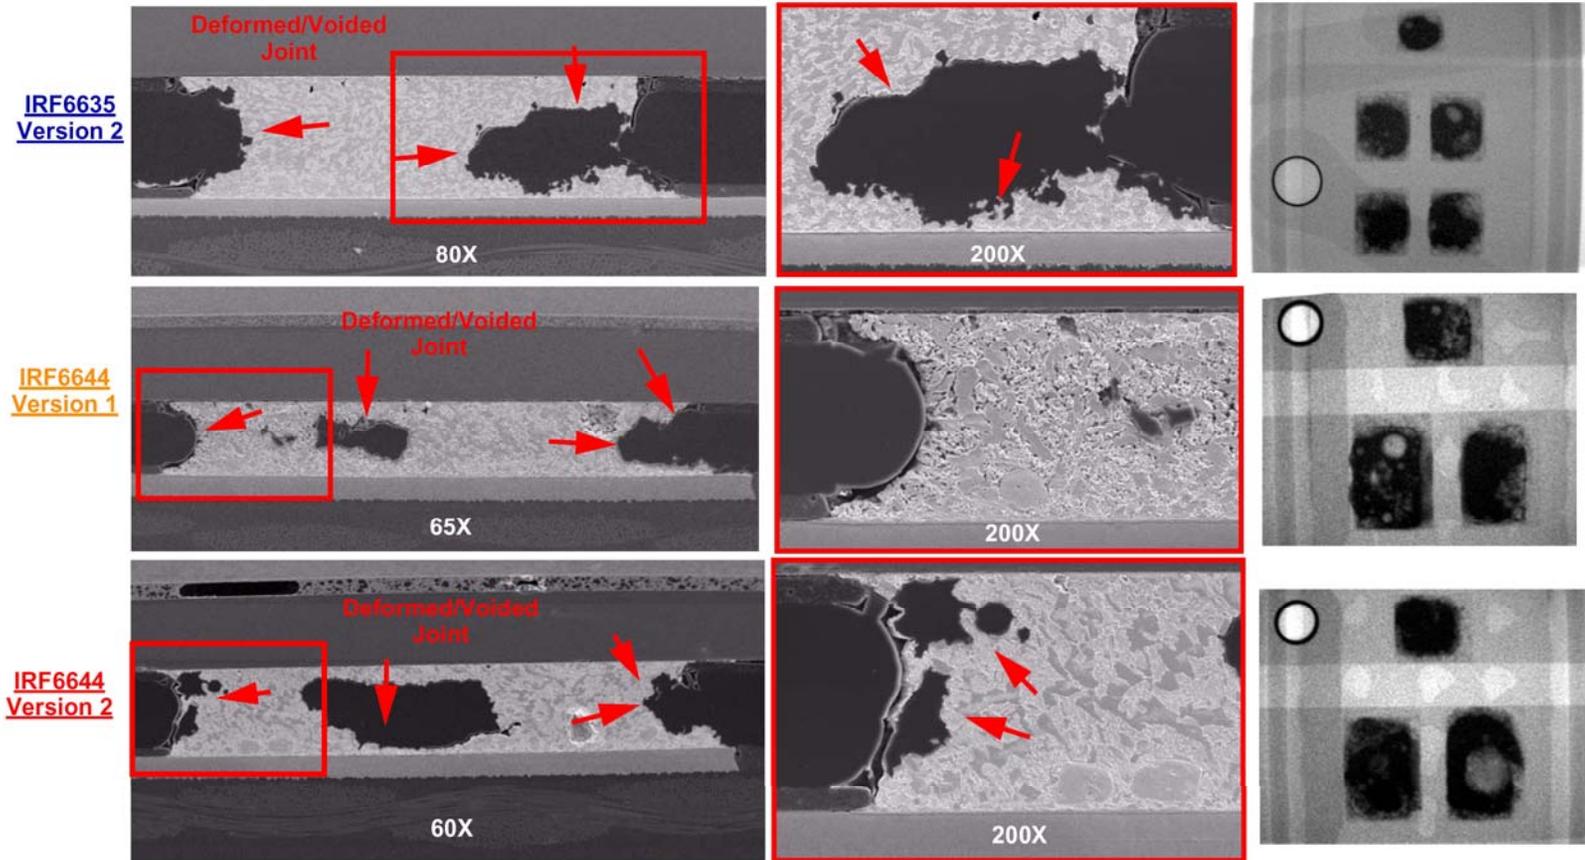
Cross-Sectional Analysis: SEM Micrographs of Pb60:In40 Soldered Assemblies and Top View X-rays
